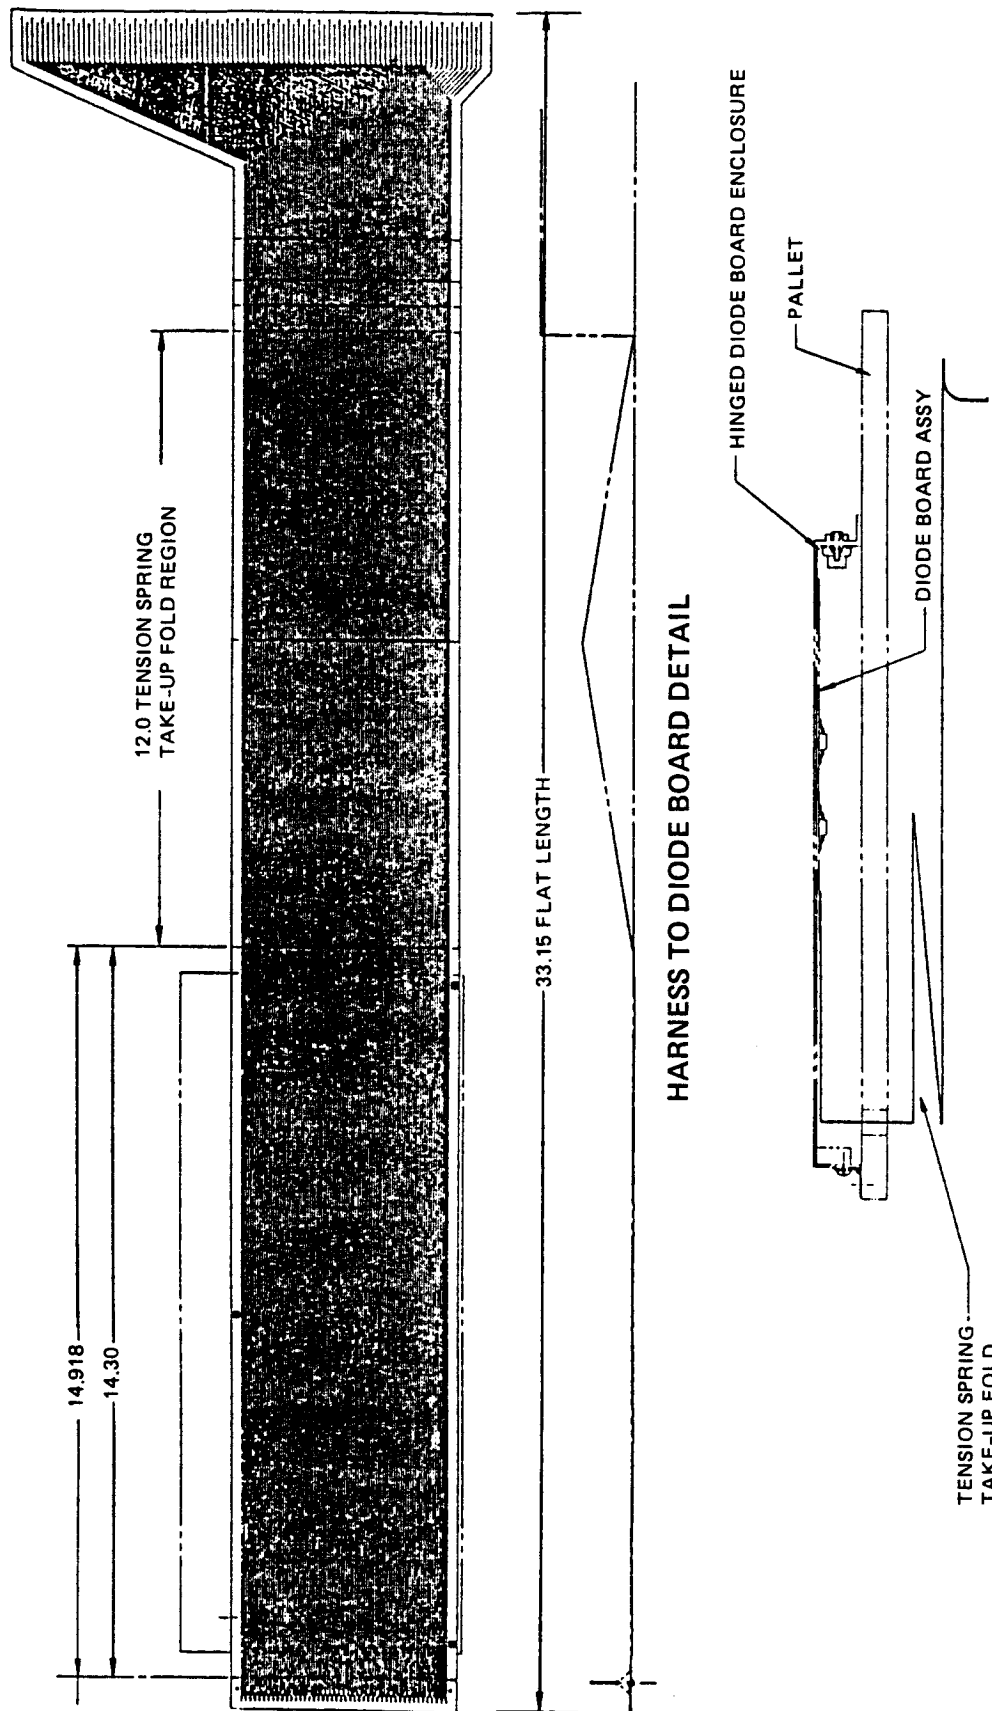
Inboard Termination Segment of Electrical Harness (Interface with Diode Box Shown) (Dimensions in inches)
